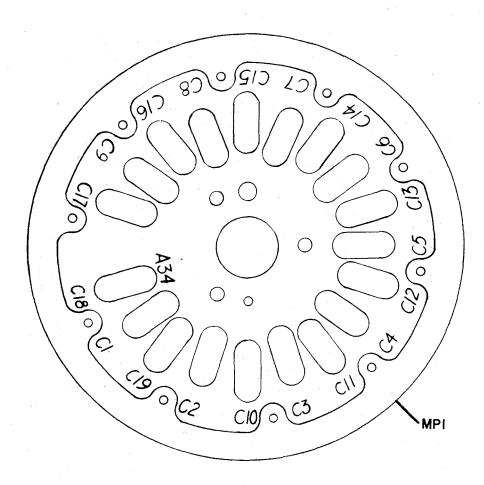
100 kHz Rotor Subassembly A2A4A34, Component Locations
